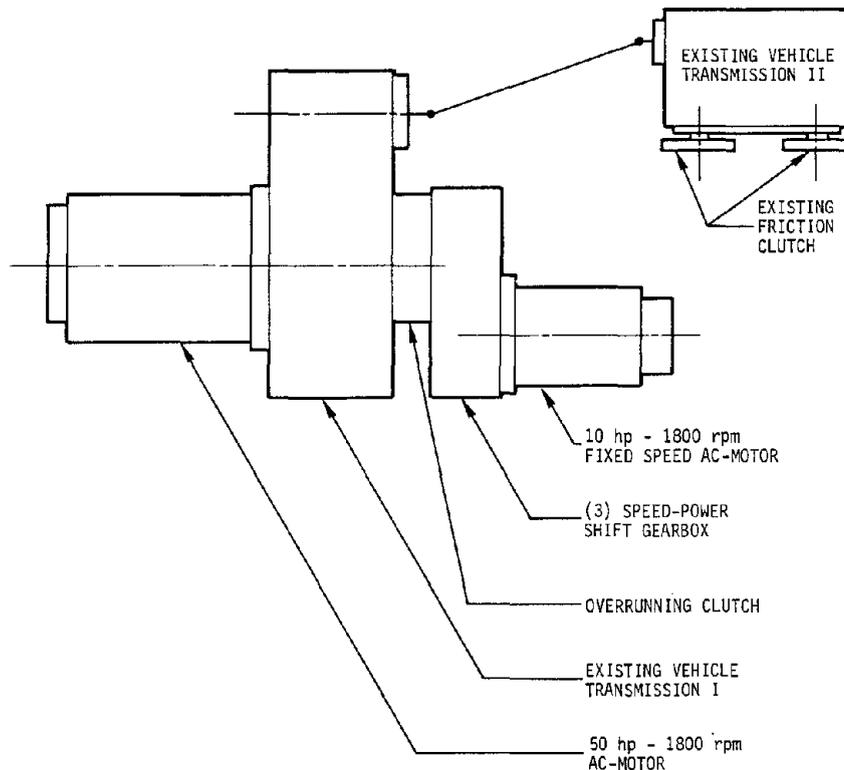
Auxiliary drive - fixed speed ac motor with three-speed powershift gearbox.
